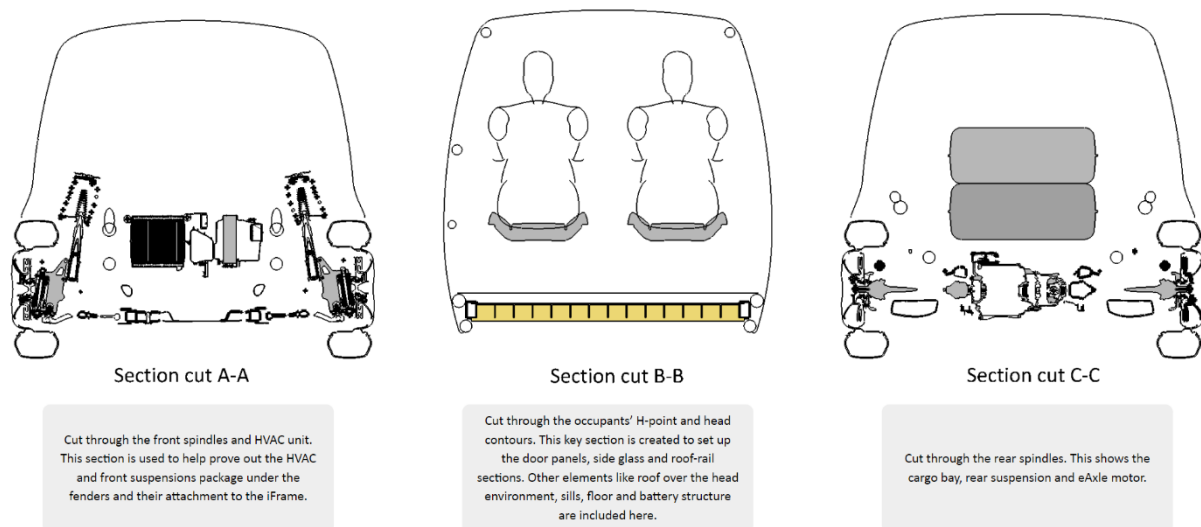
Sectional Views - Front Spindle, Occupants, Rear Spindle
